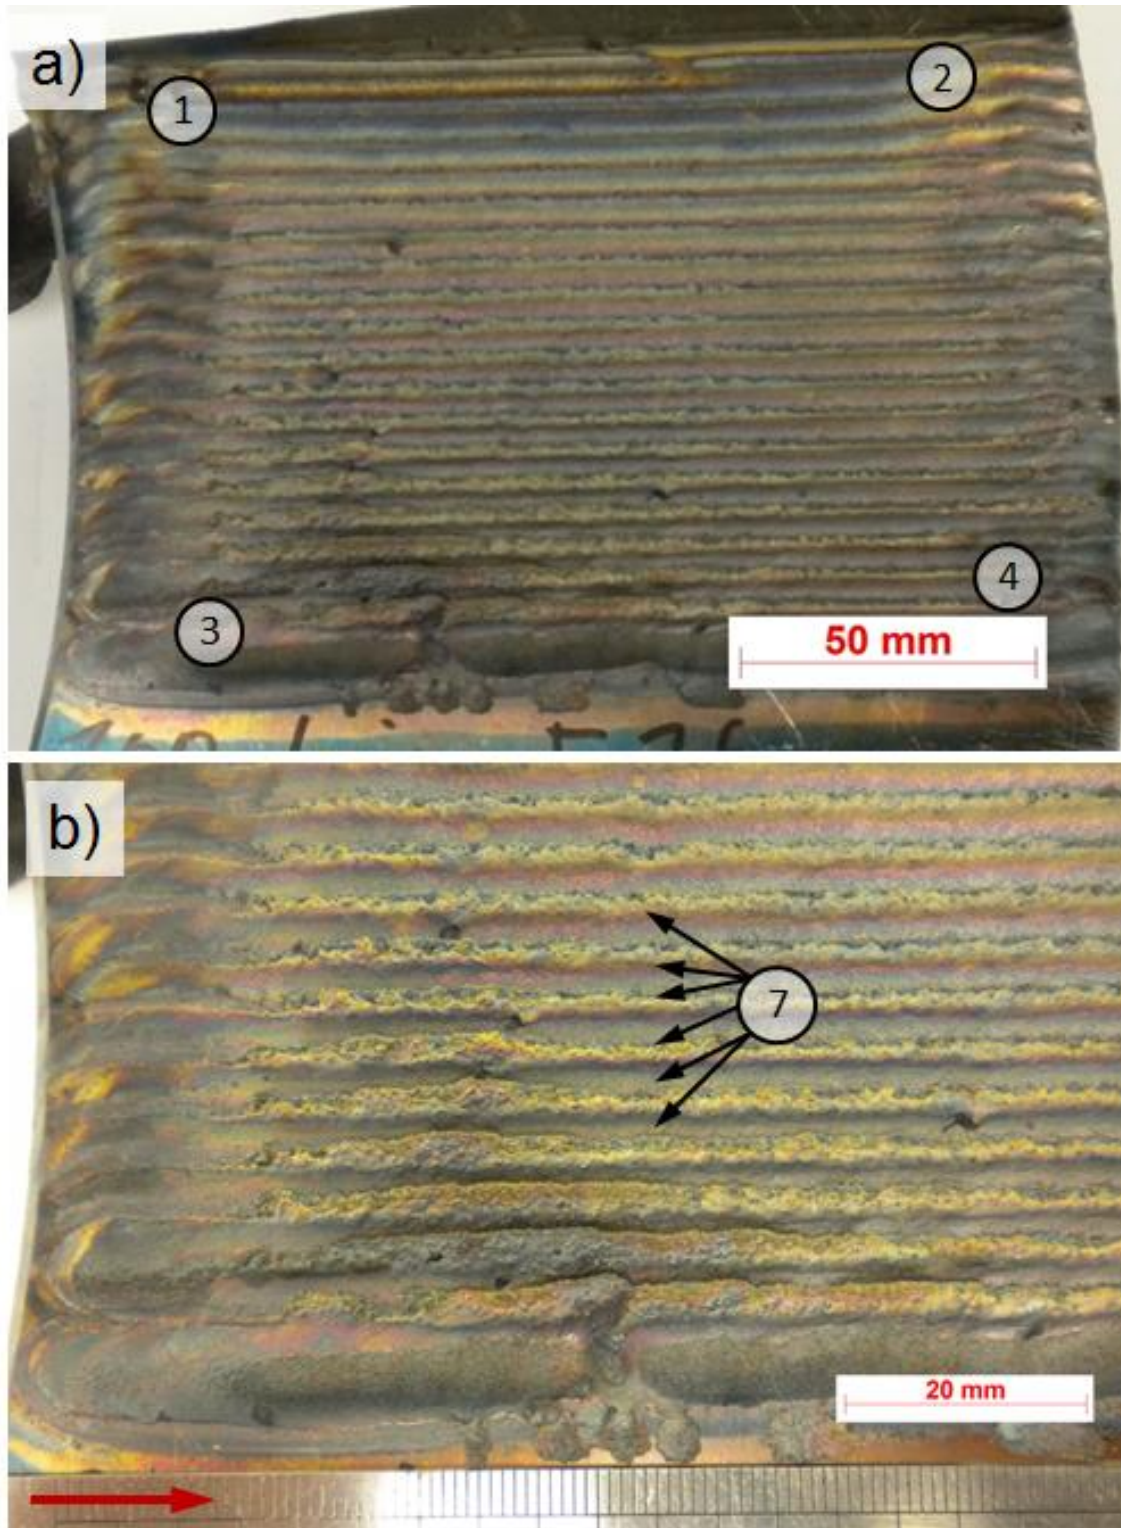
Cladding trial in overlap; a) PFR = 40 g/min; b) magnified image of a); 1: Beginning of first weld; 2: finish of first weld; 3: beginning of last weld; 4: finish of last weld; 5: unconfined WC powder; red arrow: welding direction
